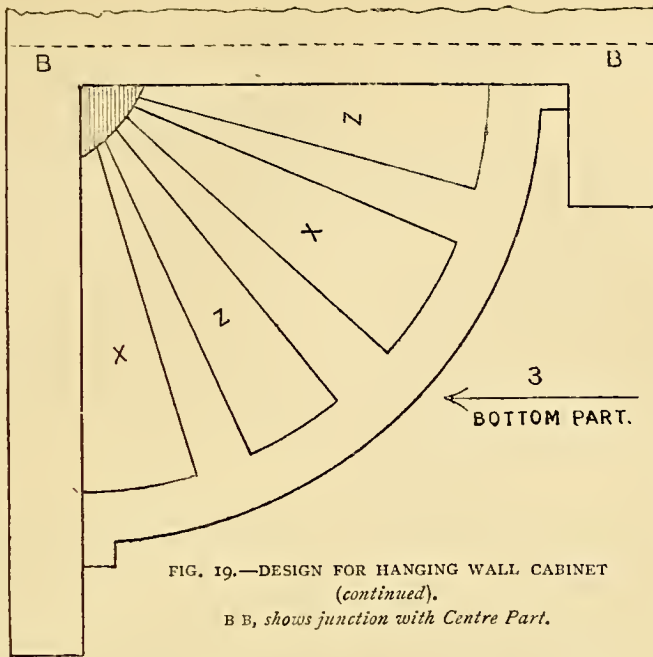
DESIGN FOR HANGING WALL CABINET
